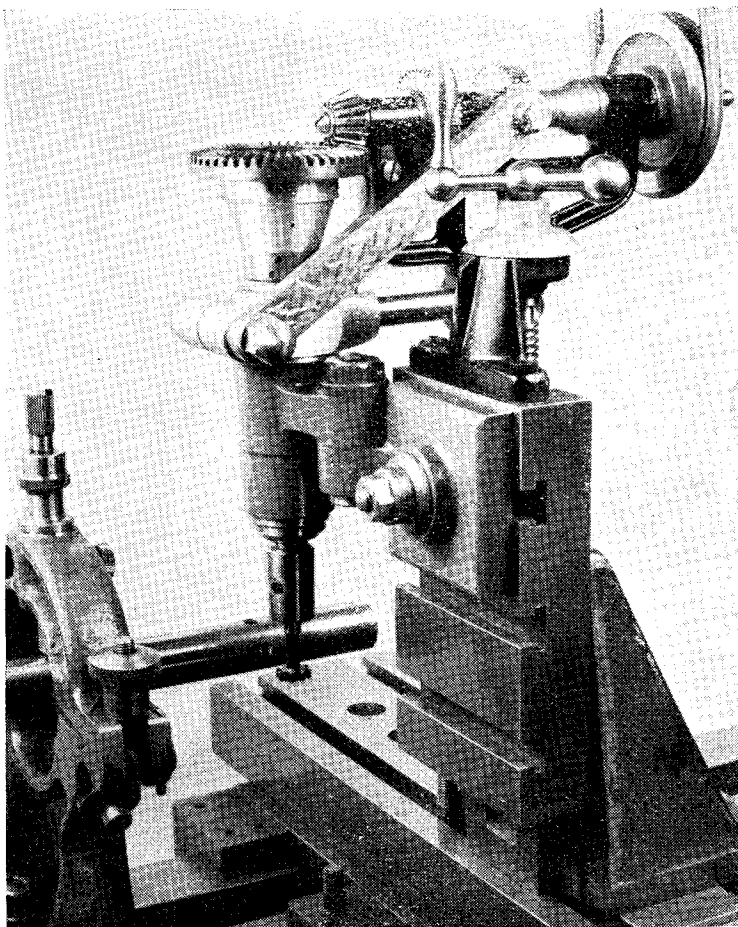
Cutting a Woodruff keyseat with a milling attachment
